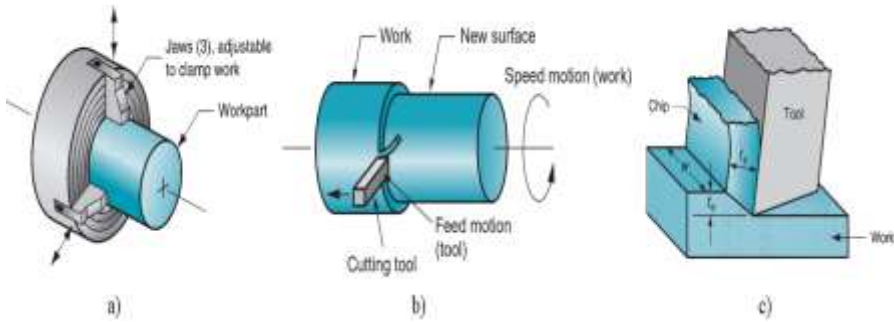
a) Lathe chuck, b) Workpiece in the turning operation, c) Chip formation [6]
